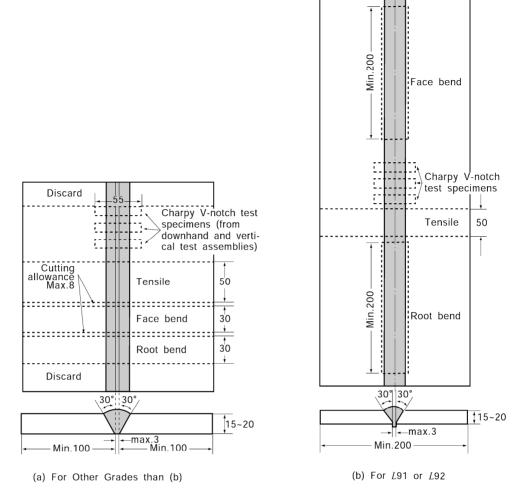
Butt weld Test Assembly for Electrode for Manual Arc Welding (Unit: mm)
